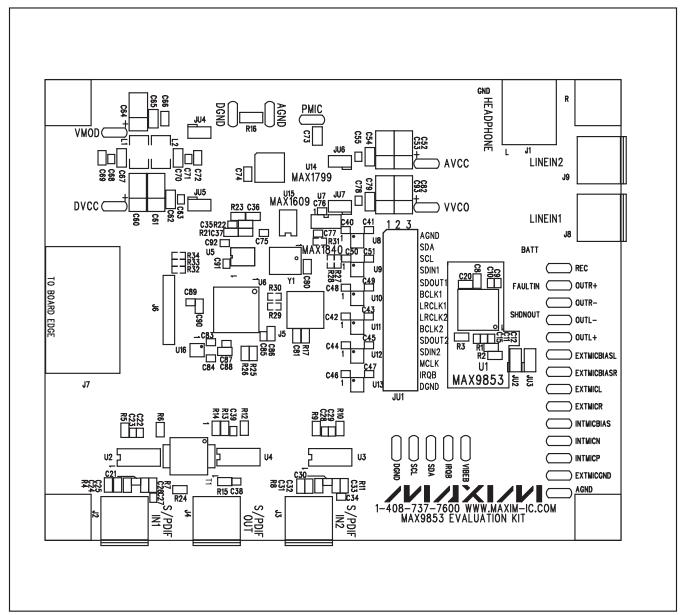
MAX9853 EV Kit Component Placement Guide—Component Side
